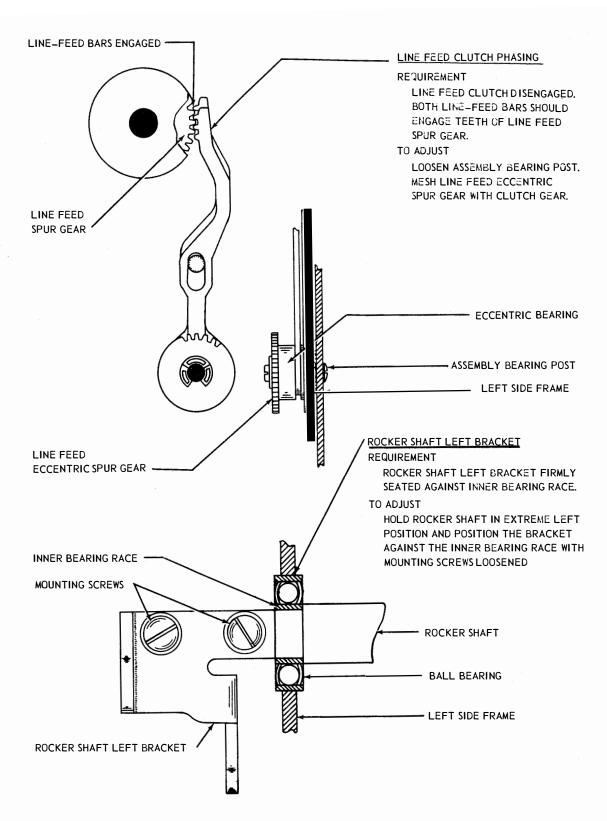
TYPING UNIT, LINE FEED AND ROCKER SHAFT MECHANISMS
